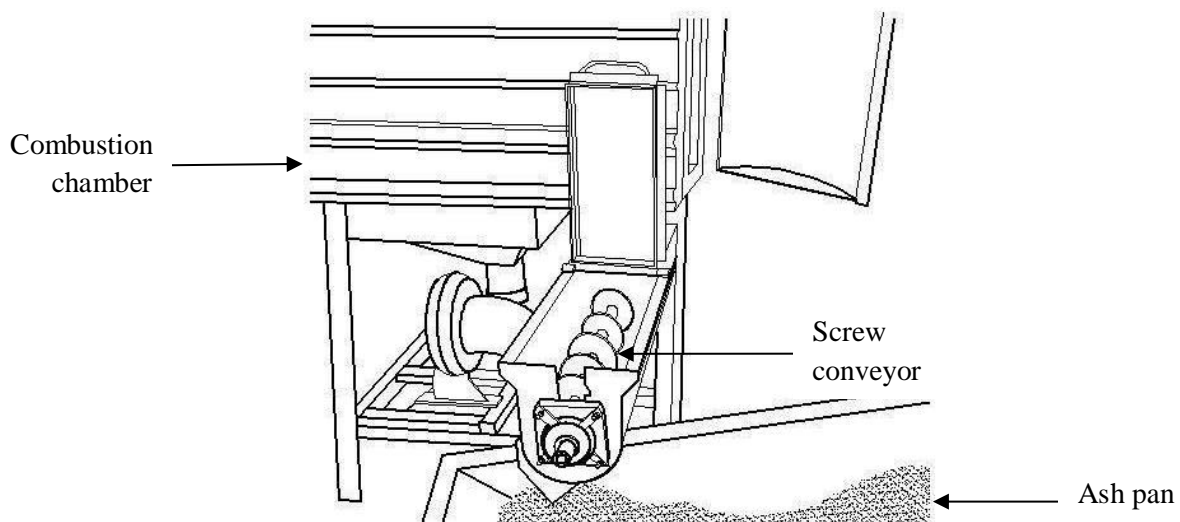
Example of ash discharge mechanism (screw conveyor)
